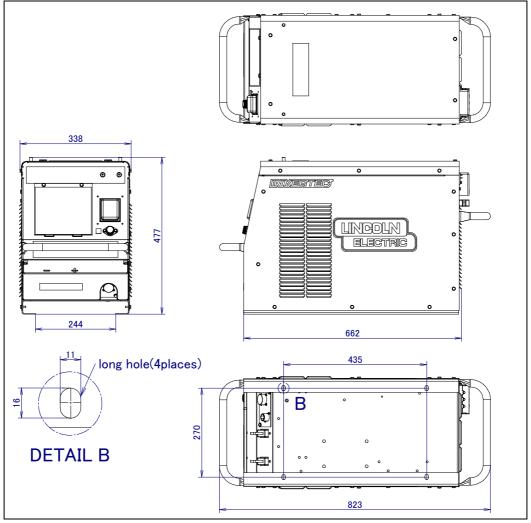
(f) Welding power supply of ROBOWELD iC/E (Invertec CV350-R)
